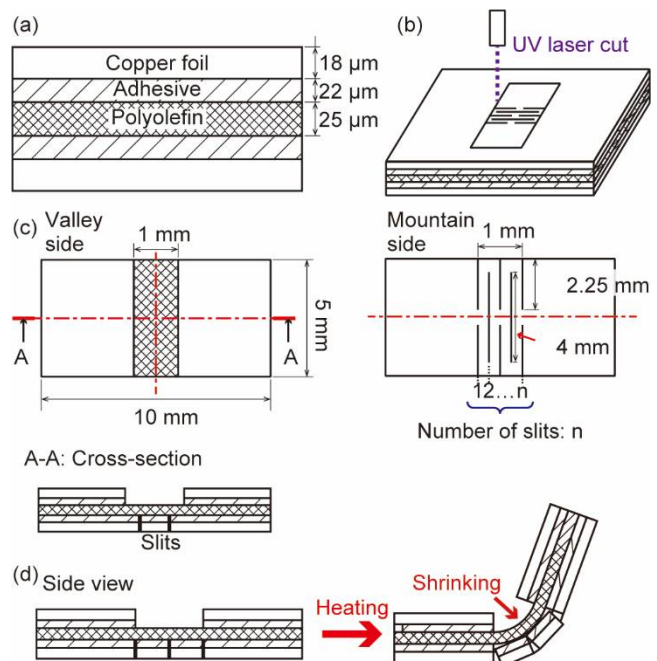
Schematic drawings of fabrication and design for self-folding. (a) Five-layered film in which polyolefin (heat shrink polymer) is sandwiched by copper foil with adhesive. (b) Fabrication by UV laser cutting plotter. (c) Dimensions of test strips. (d) Mechanism of self-folding by heat-shrinking of polyolefin.
